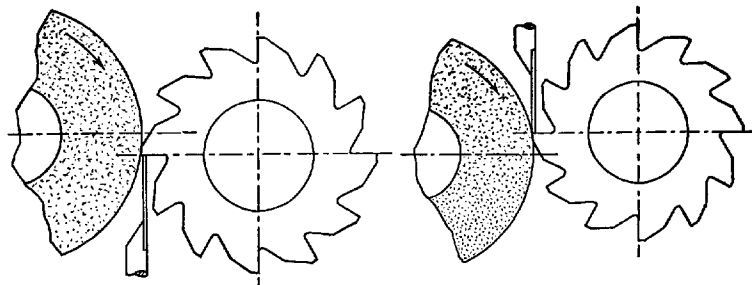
Showing method of grinding with wheel rotating off the cutting edge
